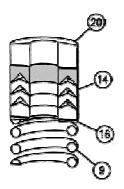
Spring Loaded PTFE V-Ring Packing Kit P/N 24494T001 (Standard)
